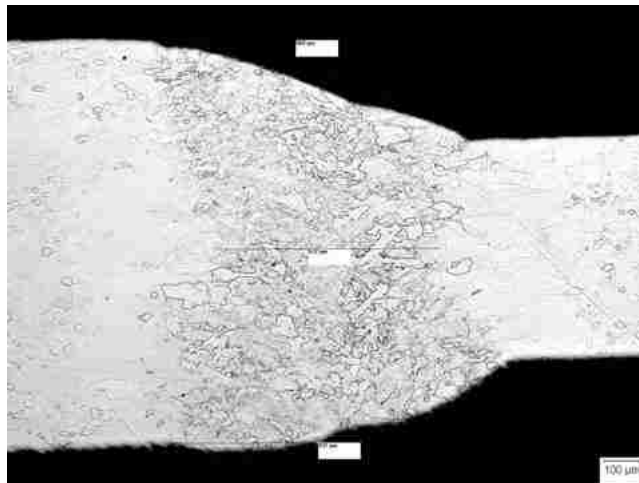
Metal compensation of butt welding on unequal thickness sheets.
